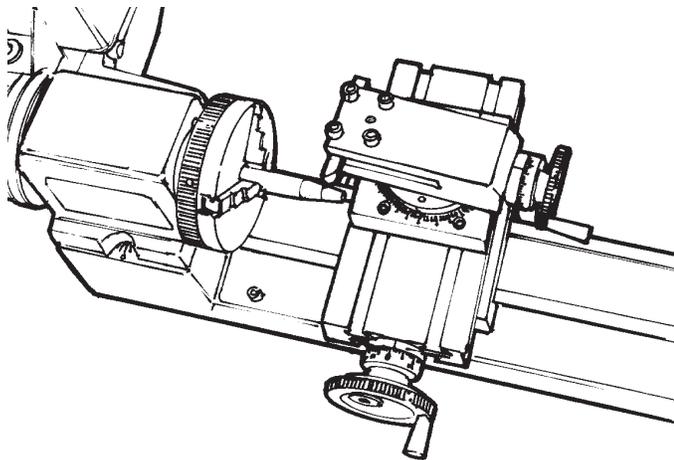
Cutting a simple taper with the compound slide eliminates the need to rotate the headstock.
